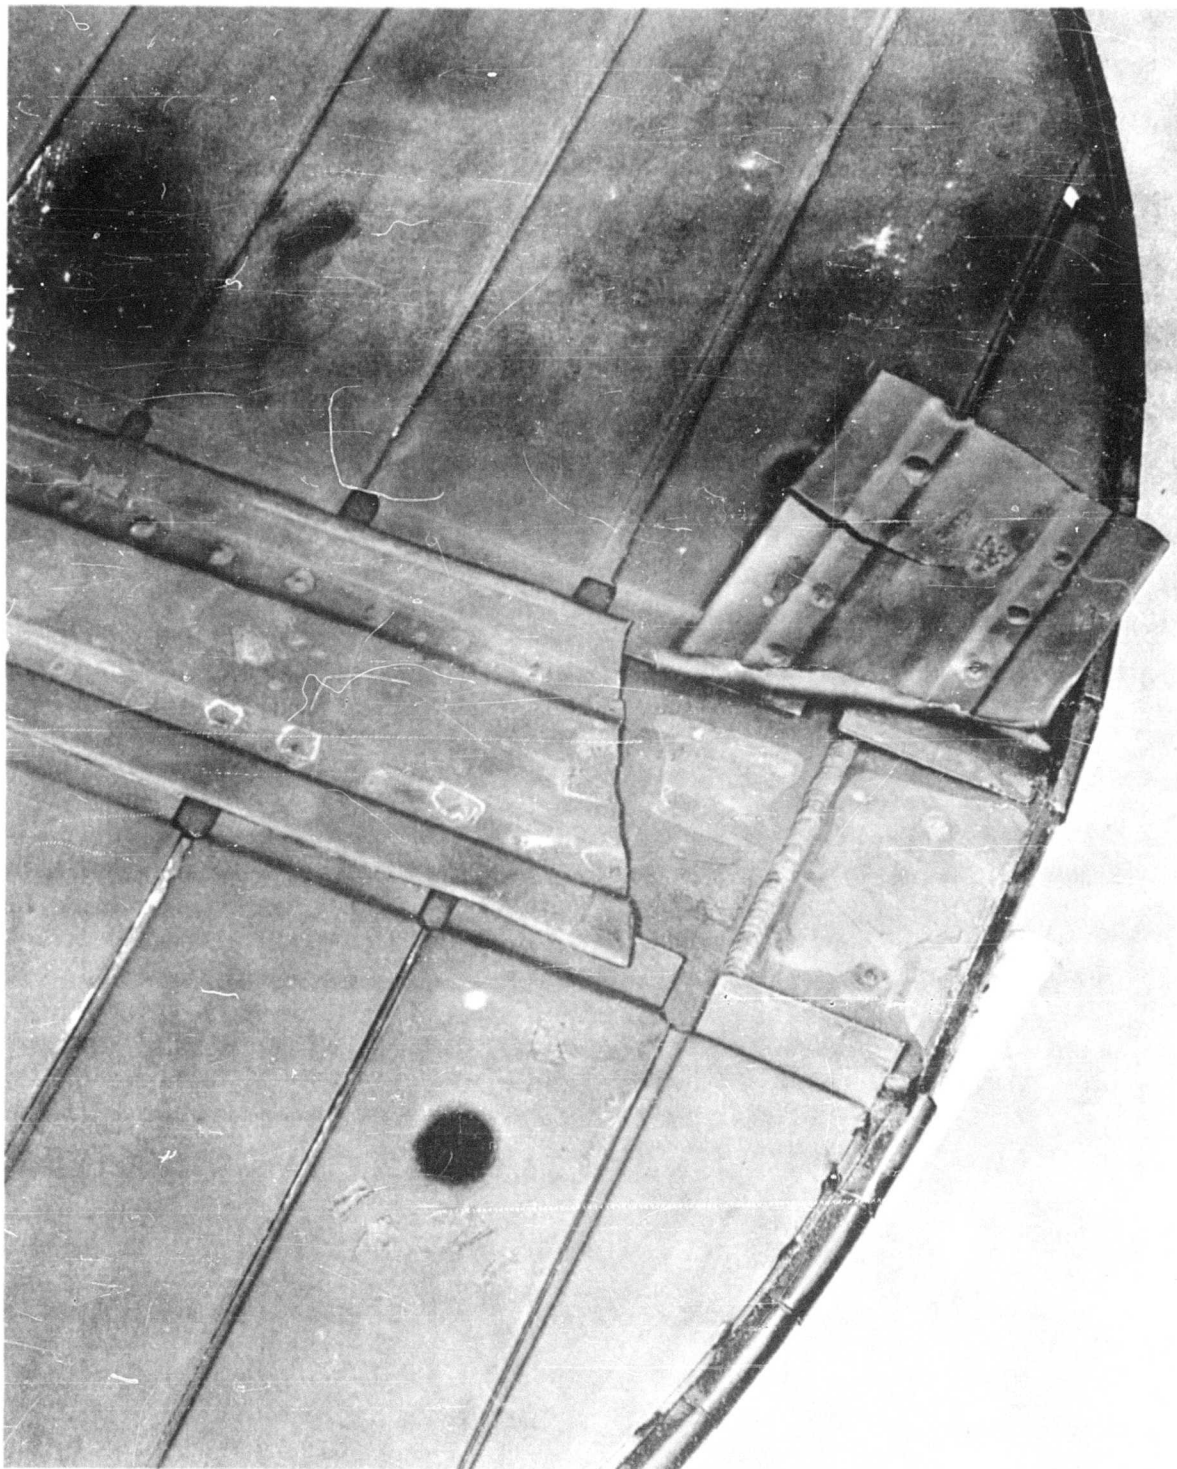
"STRAIGHT" DIVERTER VALVE DOOR, S/N001, SHOWING FAILED PIECE OF HEAT SHIELD
